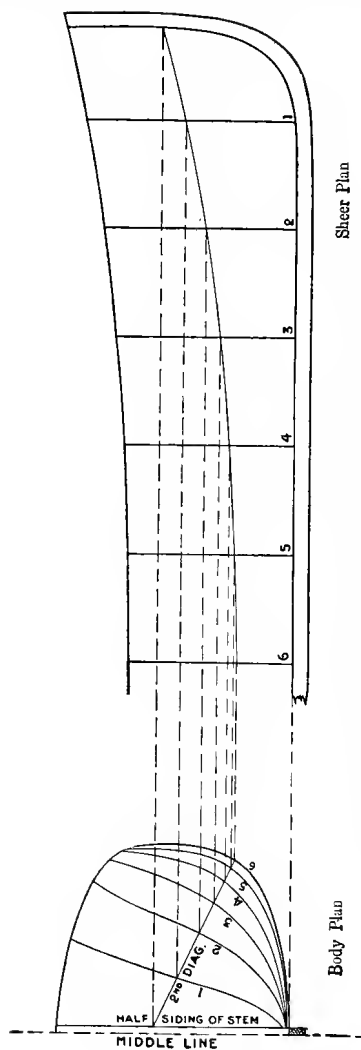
Projection of Diagonals on Sheer Plan and Body Plan.
